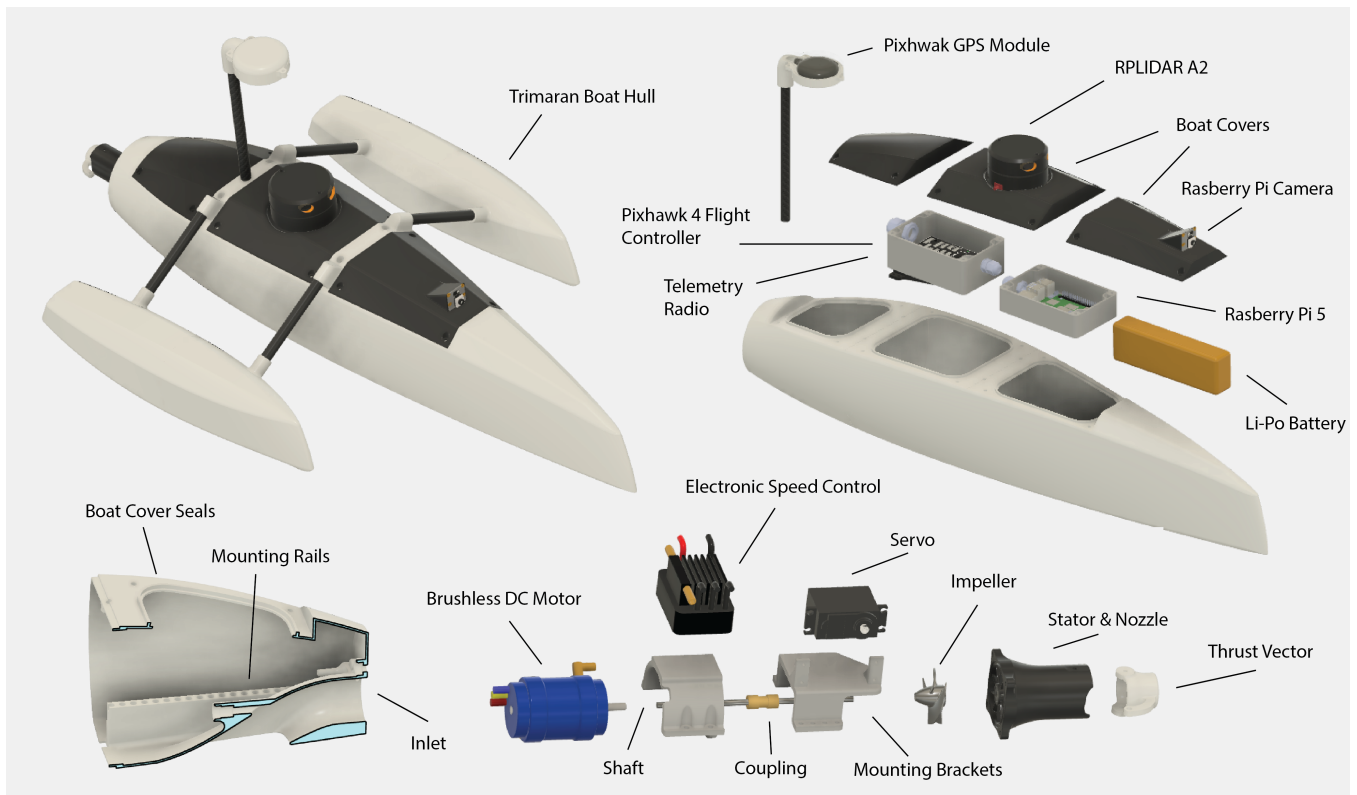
Exploded view of the proposed autonomous, 3D-printed, waterjet-powered, open-source trimaran platform.
